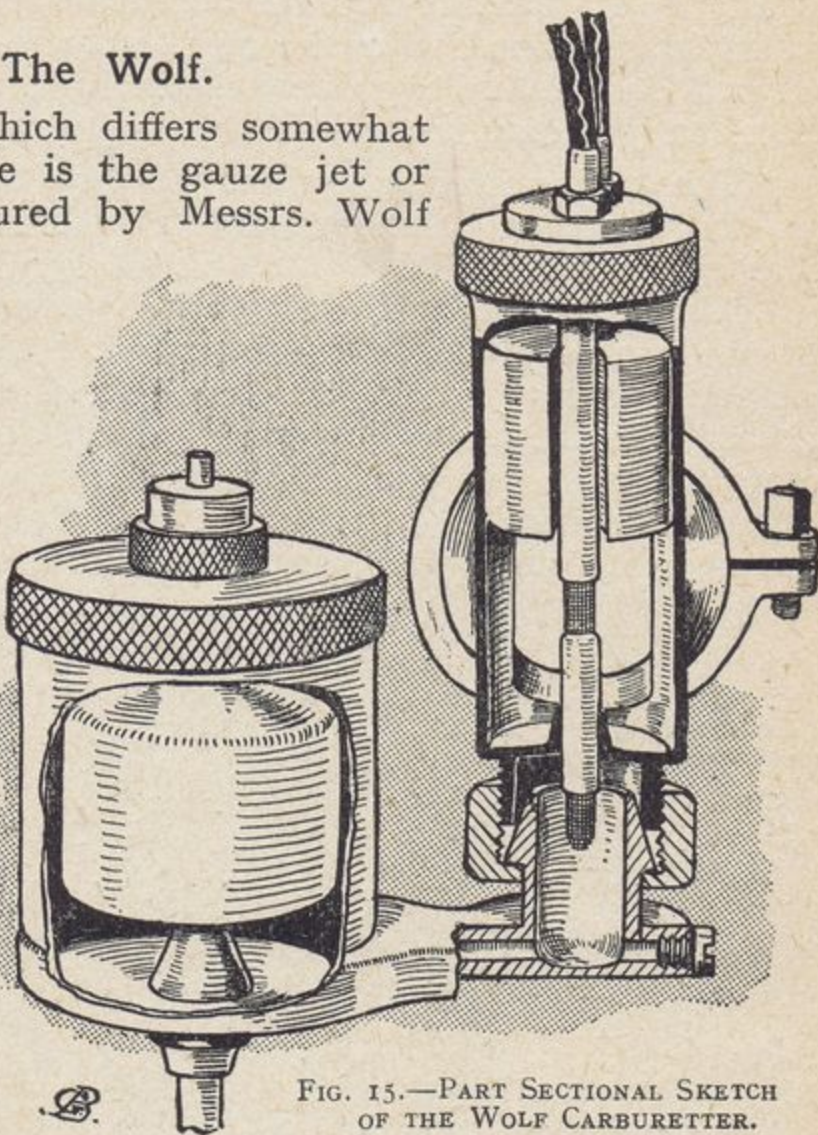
PART SECTIONAL SKETCH OF THE WOLF CARBURETTER.
